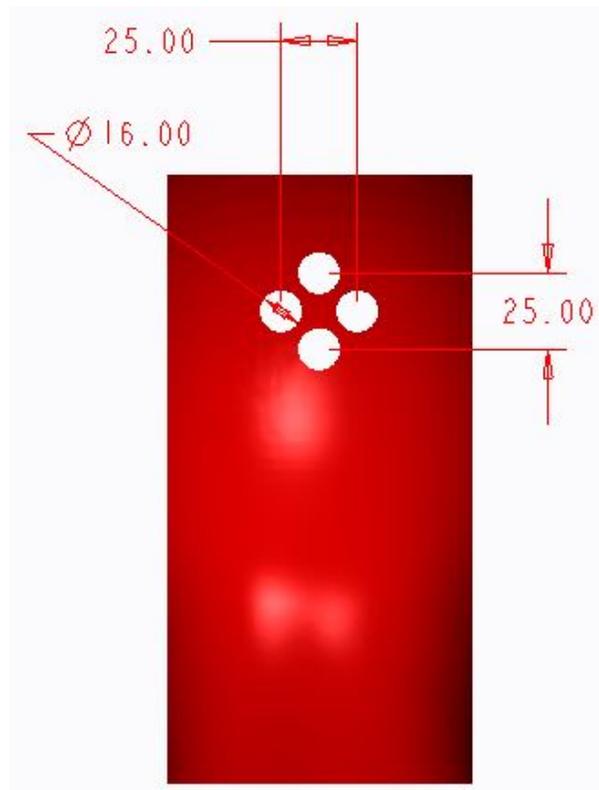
Pressure Sensor positioning in diamond shape with dimensions
